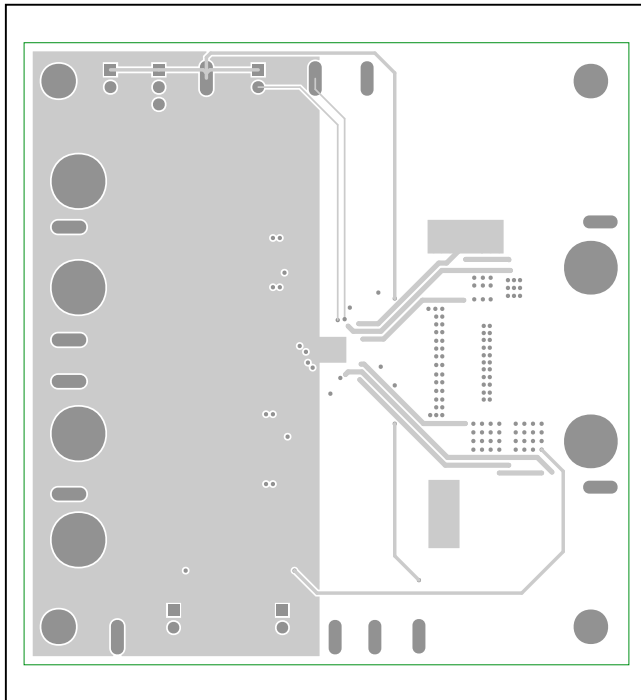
MAX17558 EV Kit PCB Layout—Inner Layer 1
